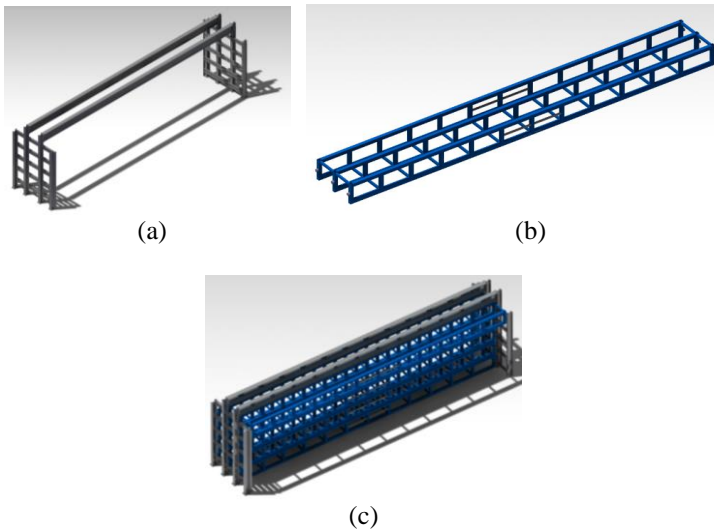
CAD model of the metal bar storage rack; (a) frame, (b) basket, and (c) assembled product
